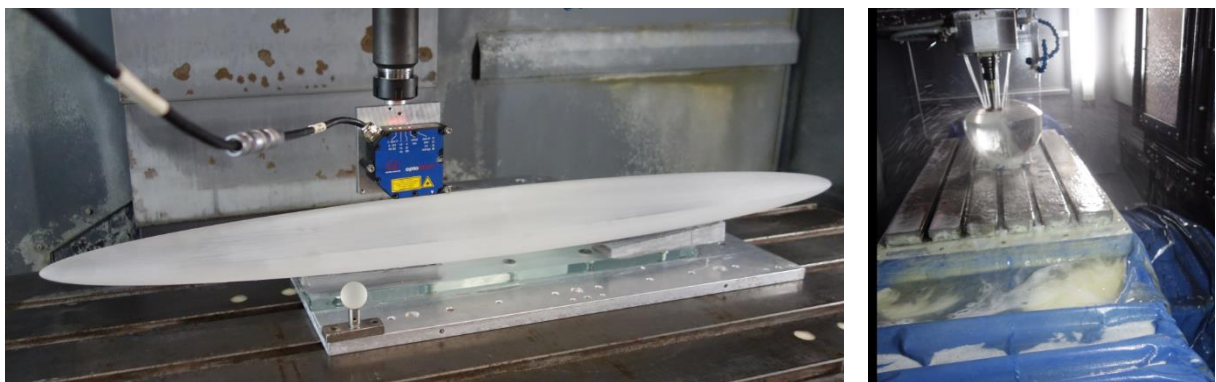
left – in situ measurement by the trigonometric sensor, right – supplementary enclosure
